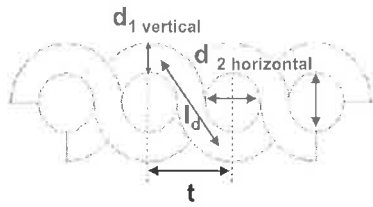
GEOMETRIC DIMENSIONS OF PRD TEXTURE
